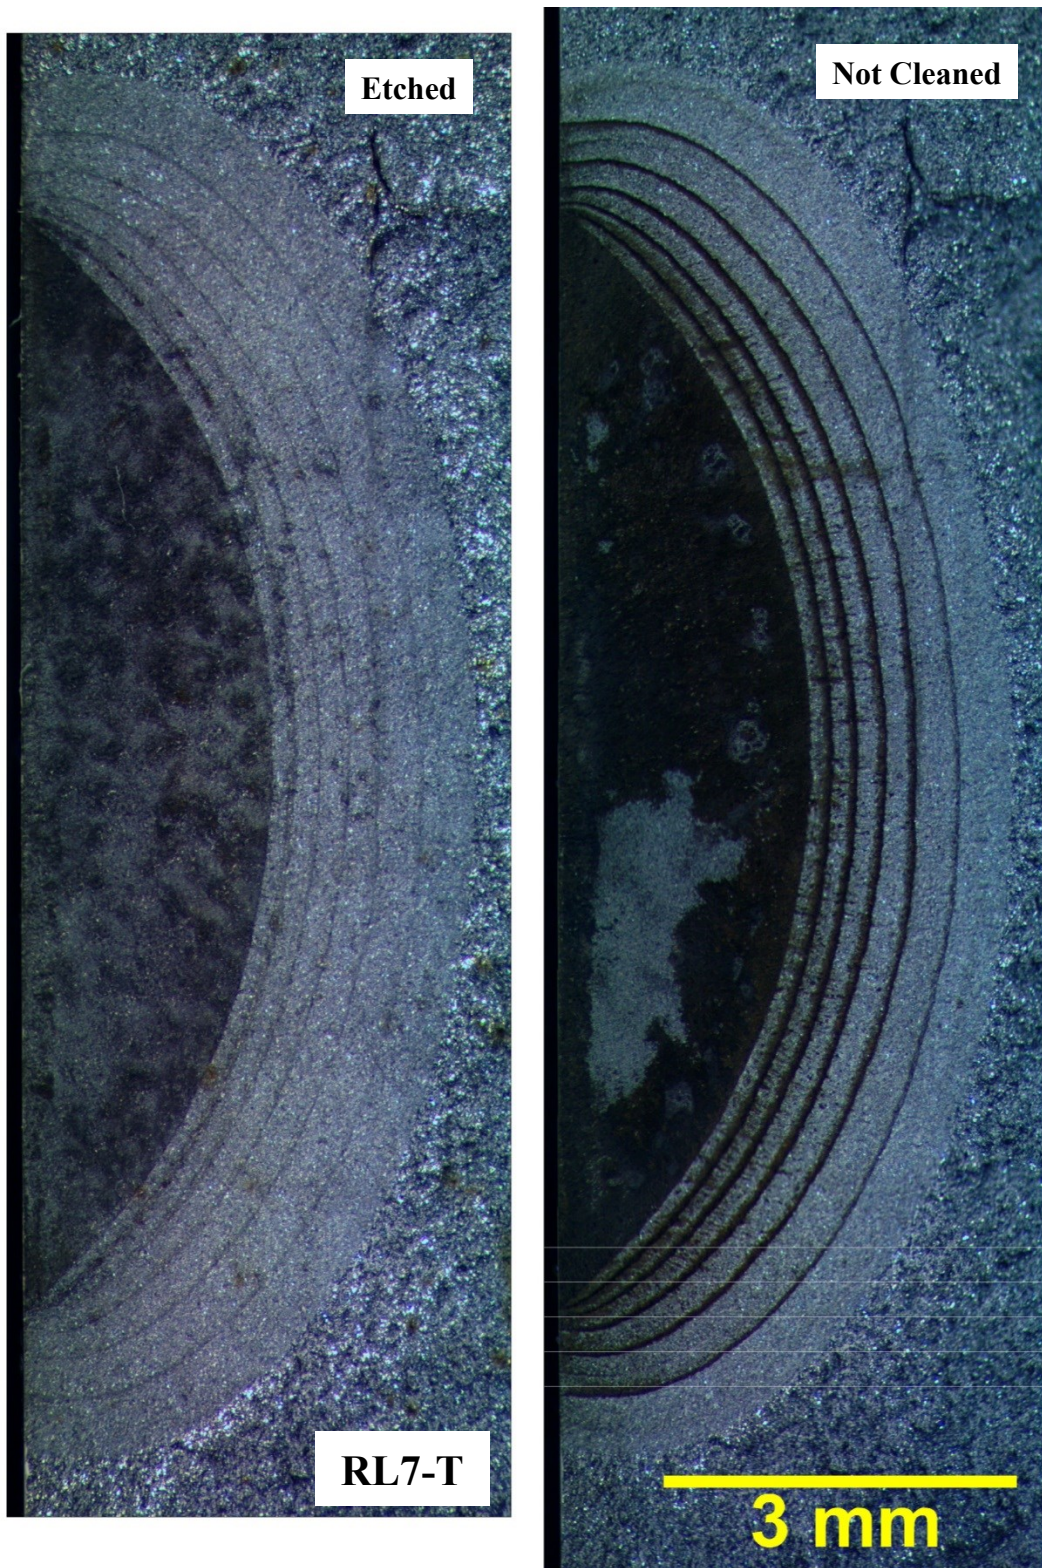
Fractograph for RL7-T. Imaged with a stereomicroscope. On the left is an etched fracture surface. On the right is a fracture surface that has not undergone cleaning.
